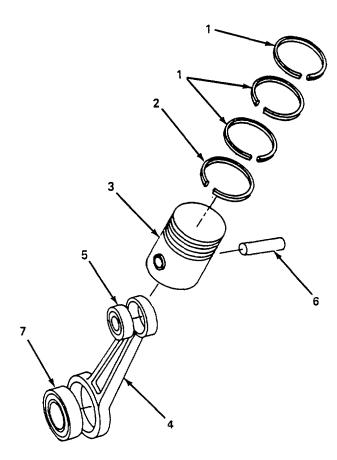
Second Stage Piston and Connecting Rod Assembly, Repair.
